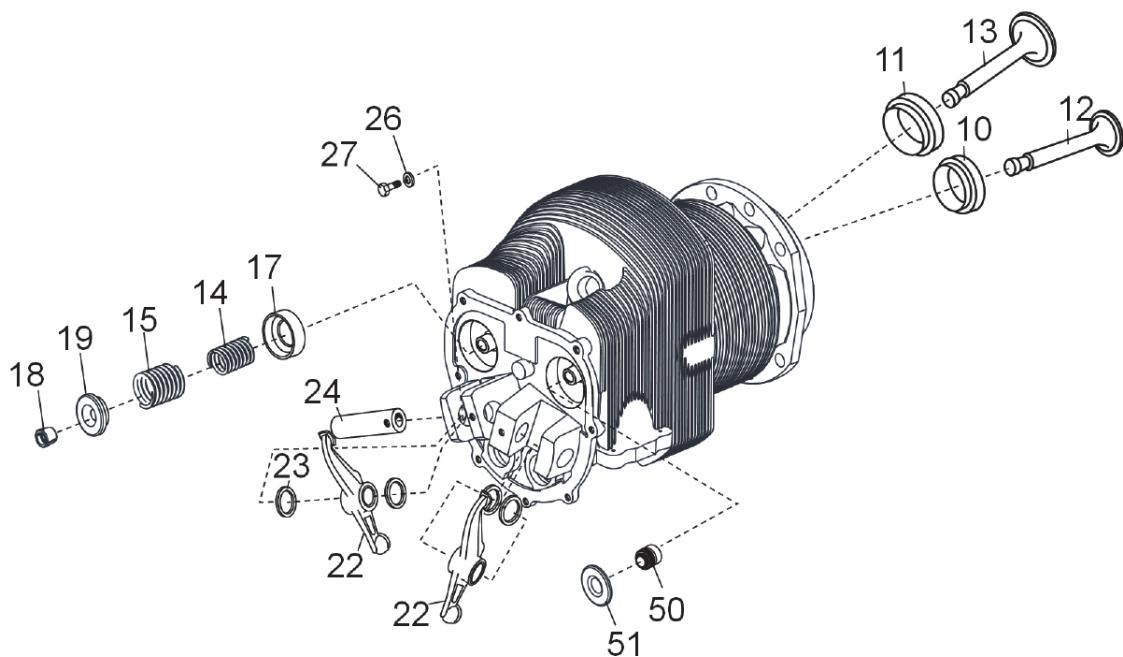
Updraft Cylinder Assembly A B C
